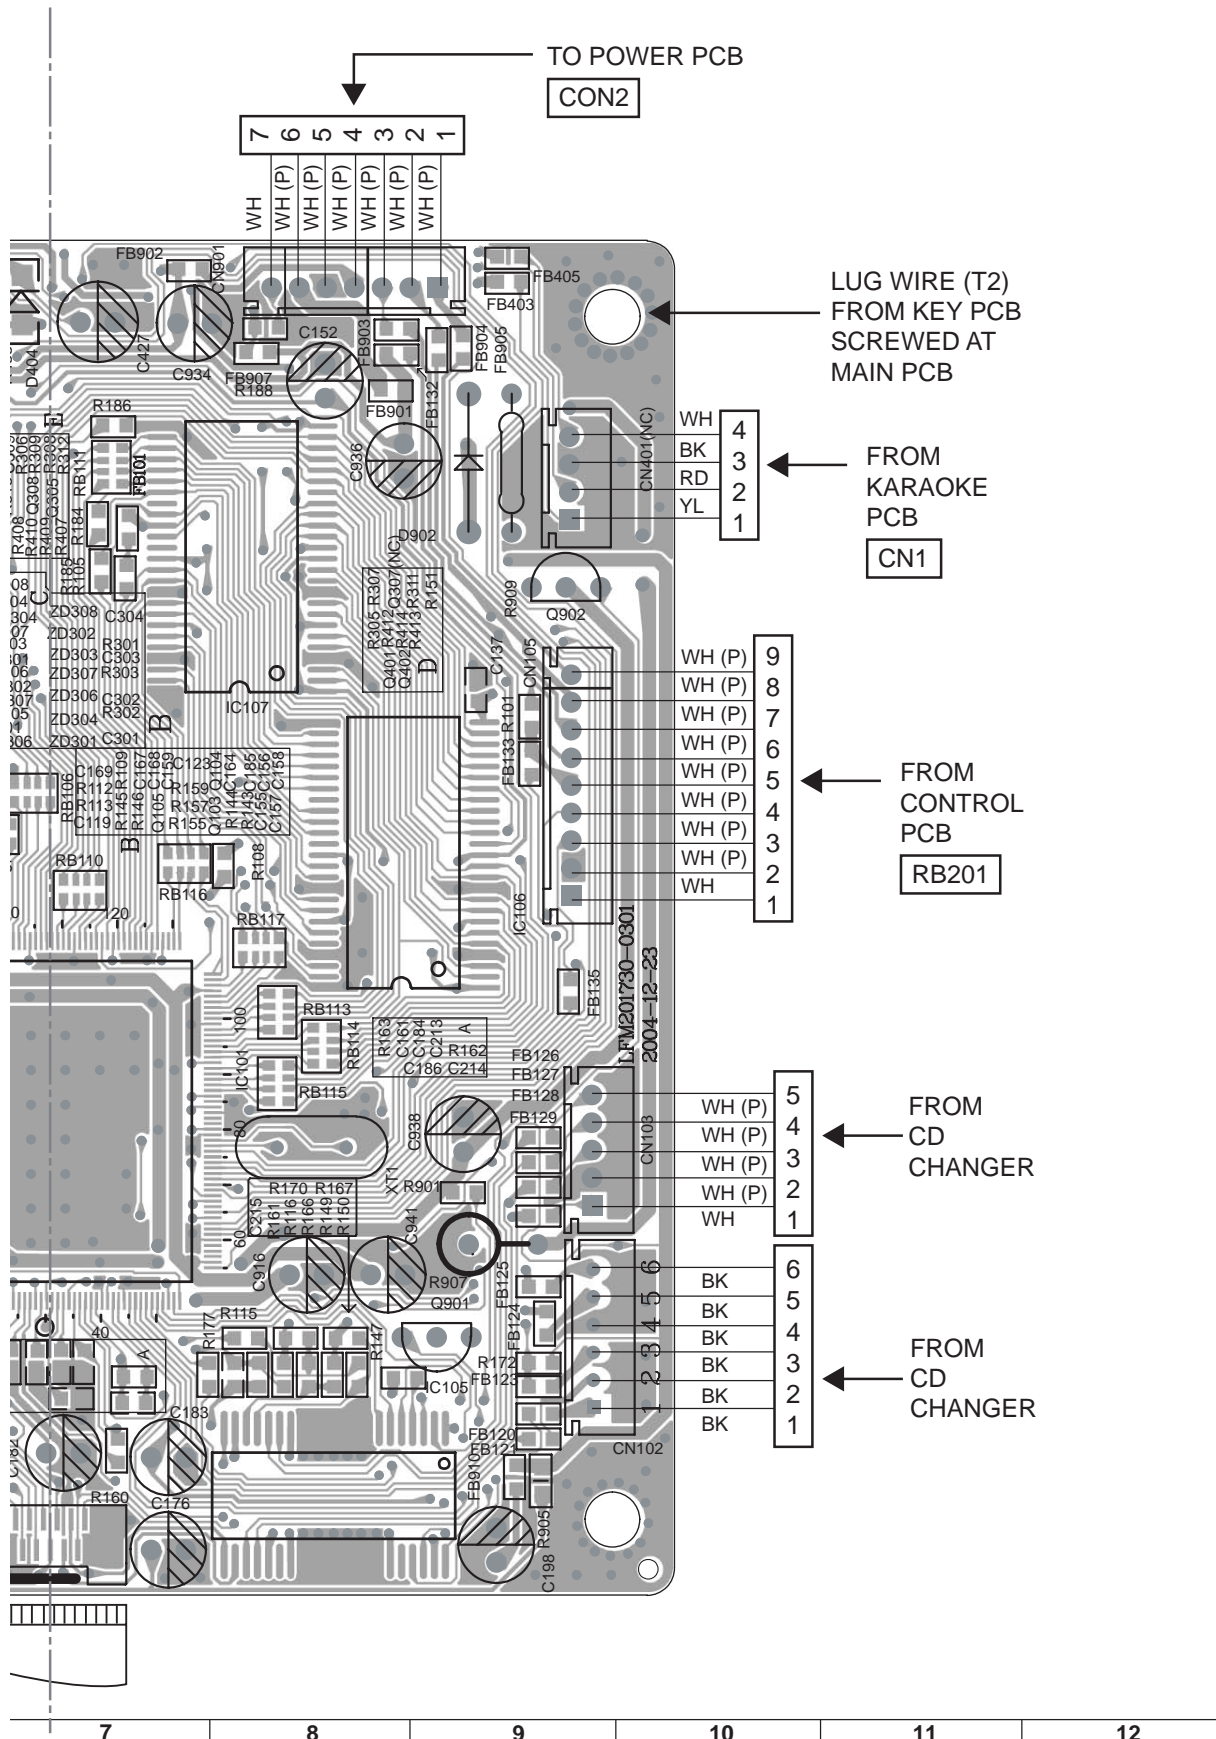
WIRING SIDE OF MAIN PCB (TOP VIEW) (2/2)
